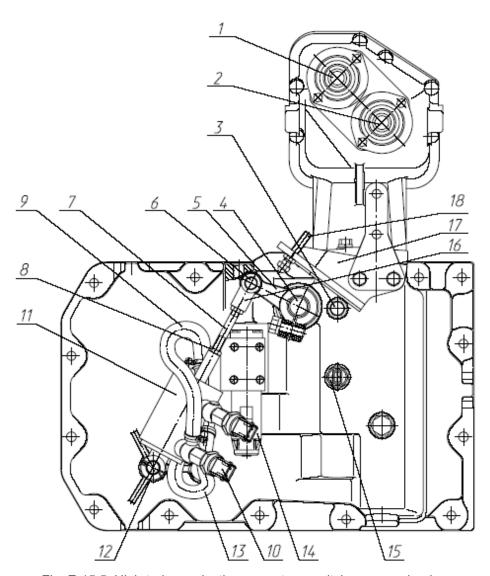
High-to-low reduction gear stage switch-over mechanism:
